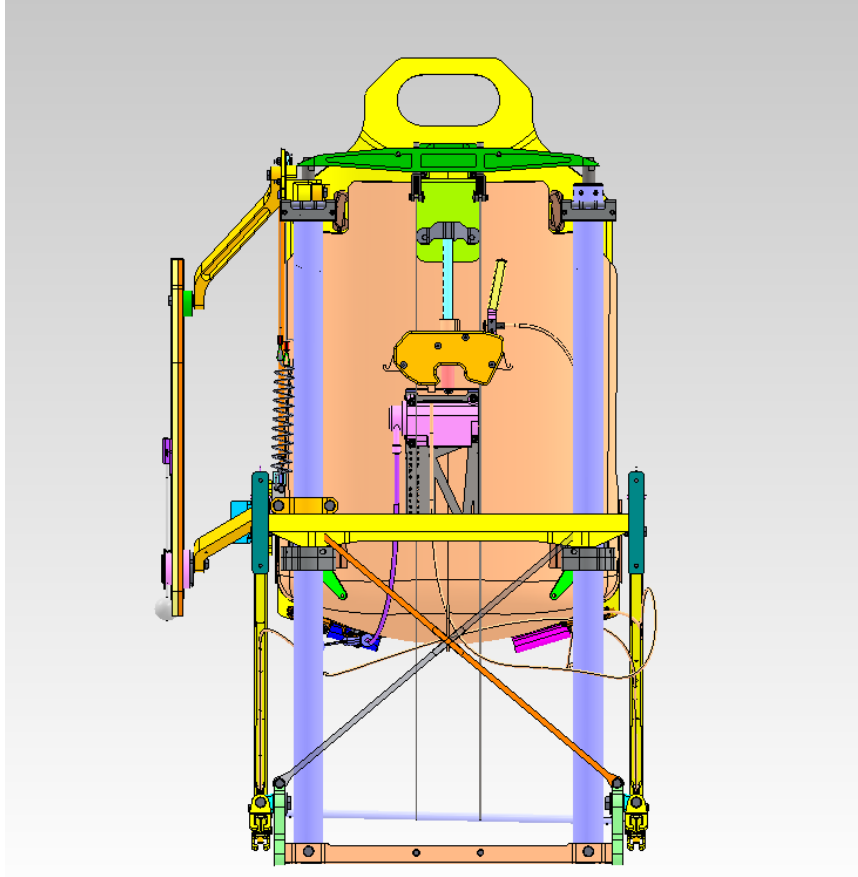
AVASS Roller Bearing Design V2.0 Fully Installed
